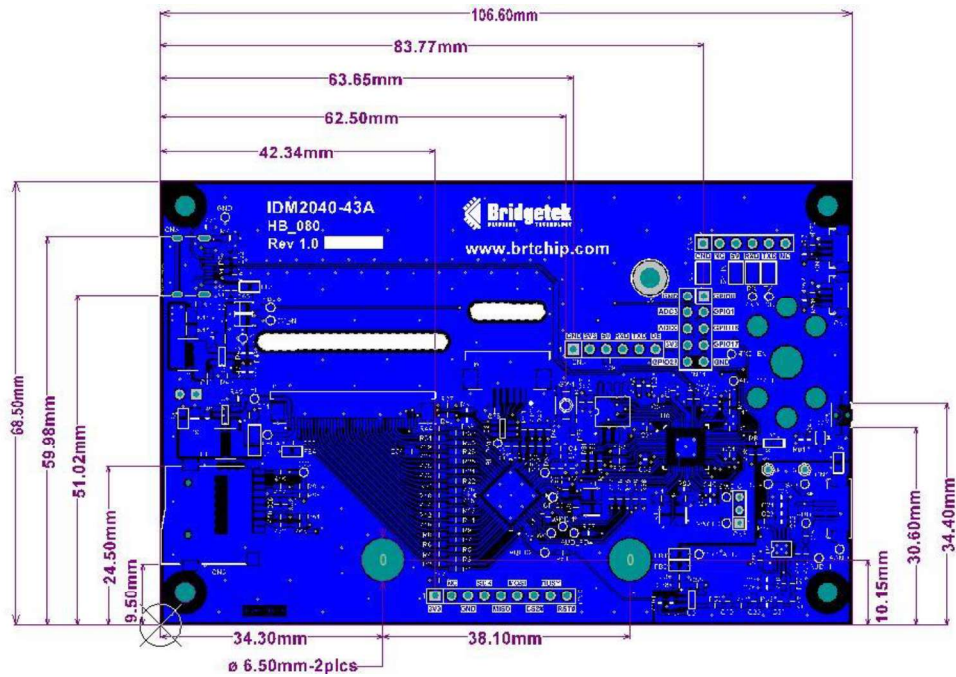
IDM2040-43A PCBA Dimensions (Top View)
